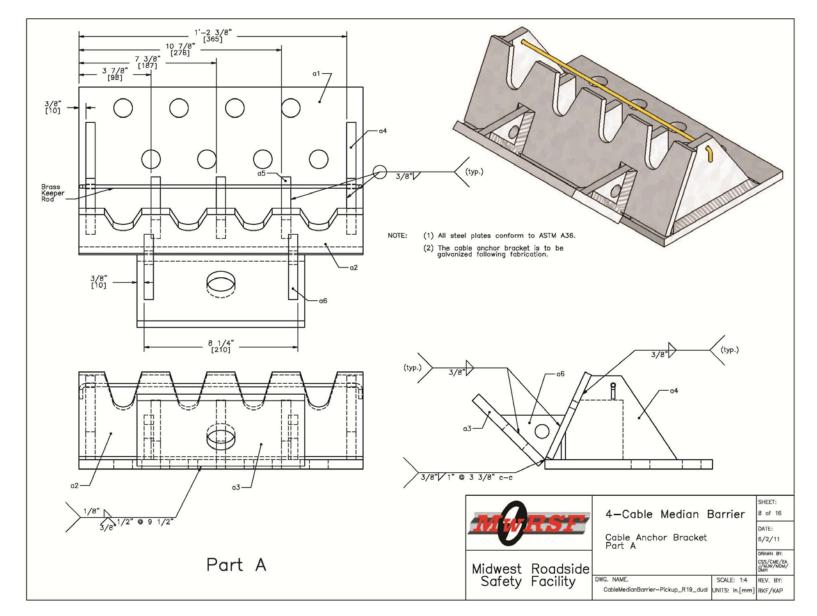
Cable Anchor Bracket, Part A, Test No. 4CMB-1
